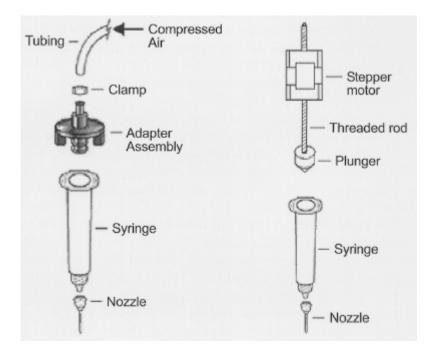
42: Graphical illustration shows the pneumatic (left), and mechanical dispenser (right) assemblies [69]
